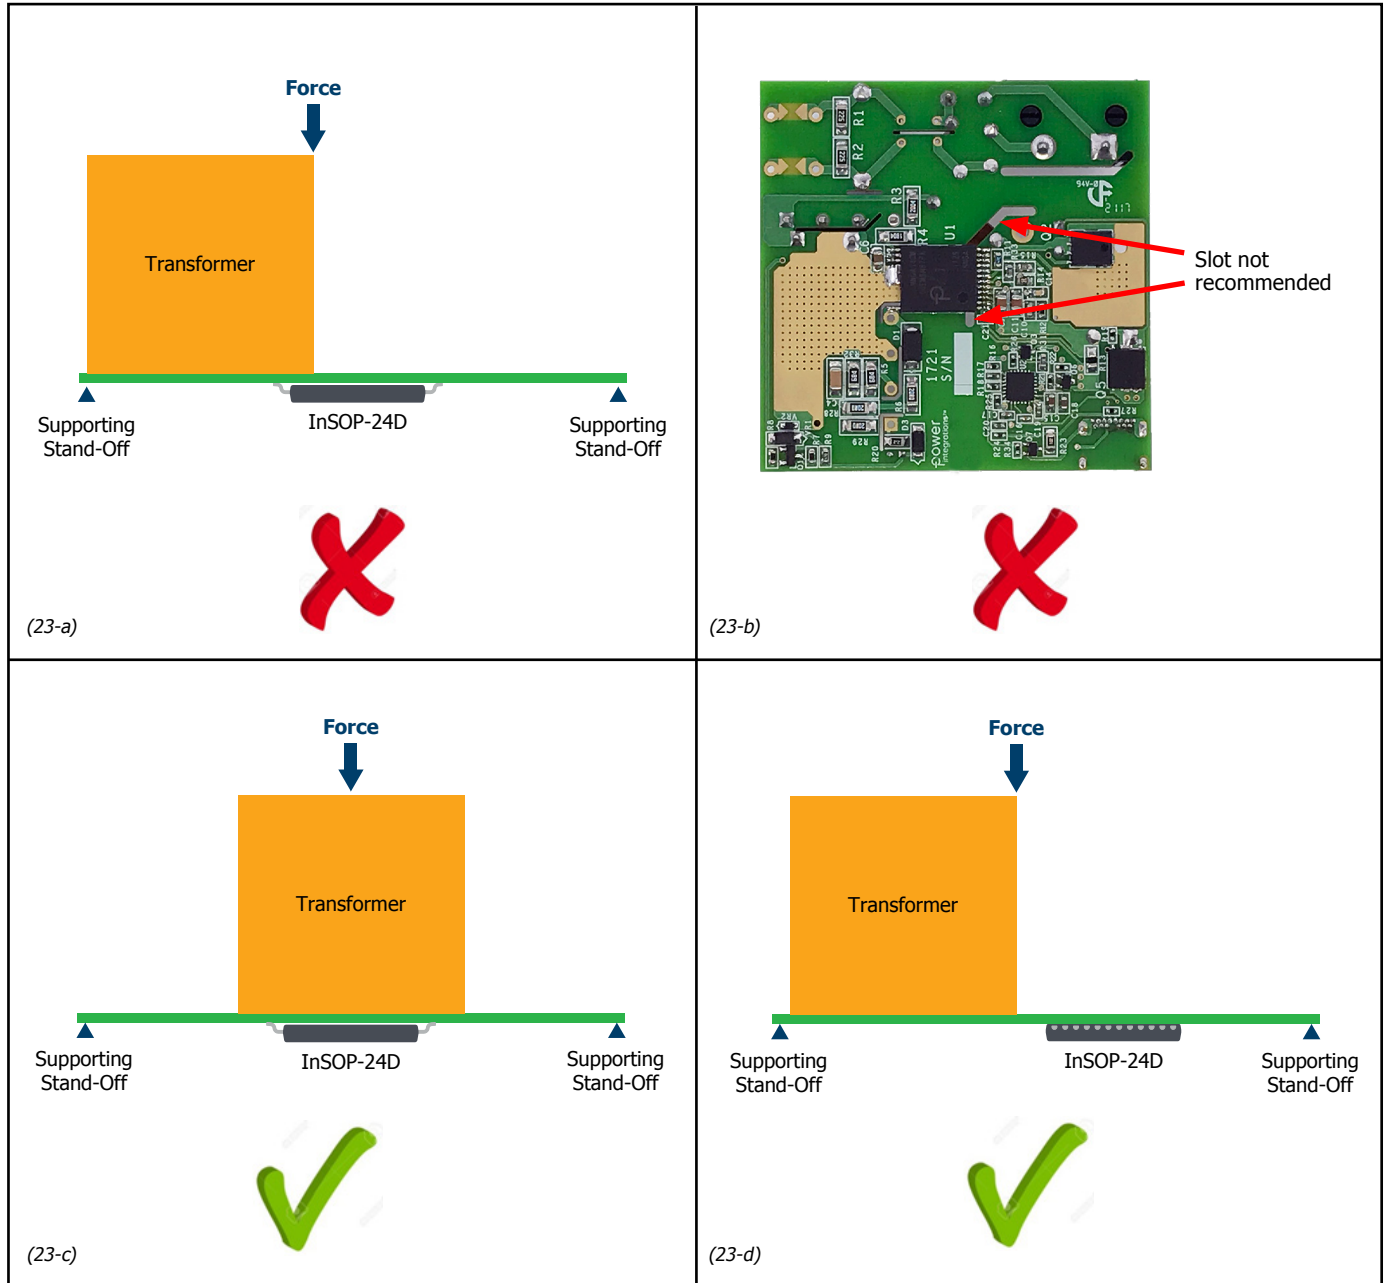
Recommended Position of InSOP-24D Package Shown with Check Mark.
